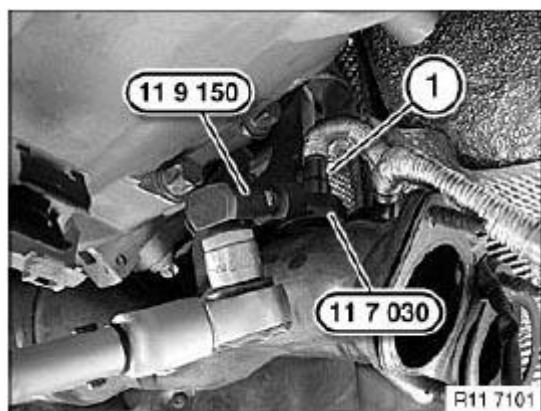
Releasing Monitor Sensor With Special Tools (11 7 030) And (11 9 150)
